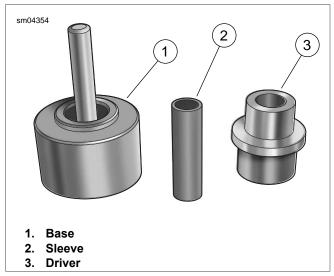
Rear Wheel Compensator Sprocket Bearing Remover/Installer (Part No. HD-48921)
